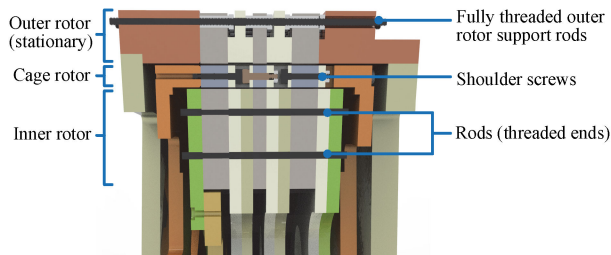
Positioning of inner, cage, and outer rotors connecting components of stage 2 MG
